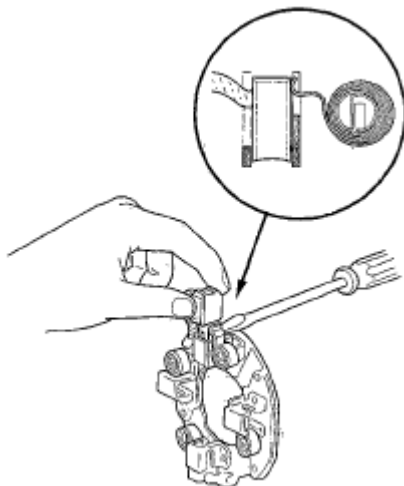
Prying Back Each Brush Spring With Screwdriver
